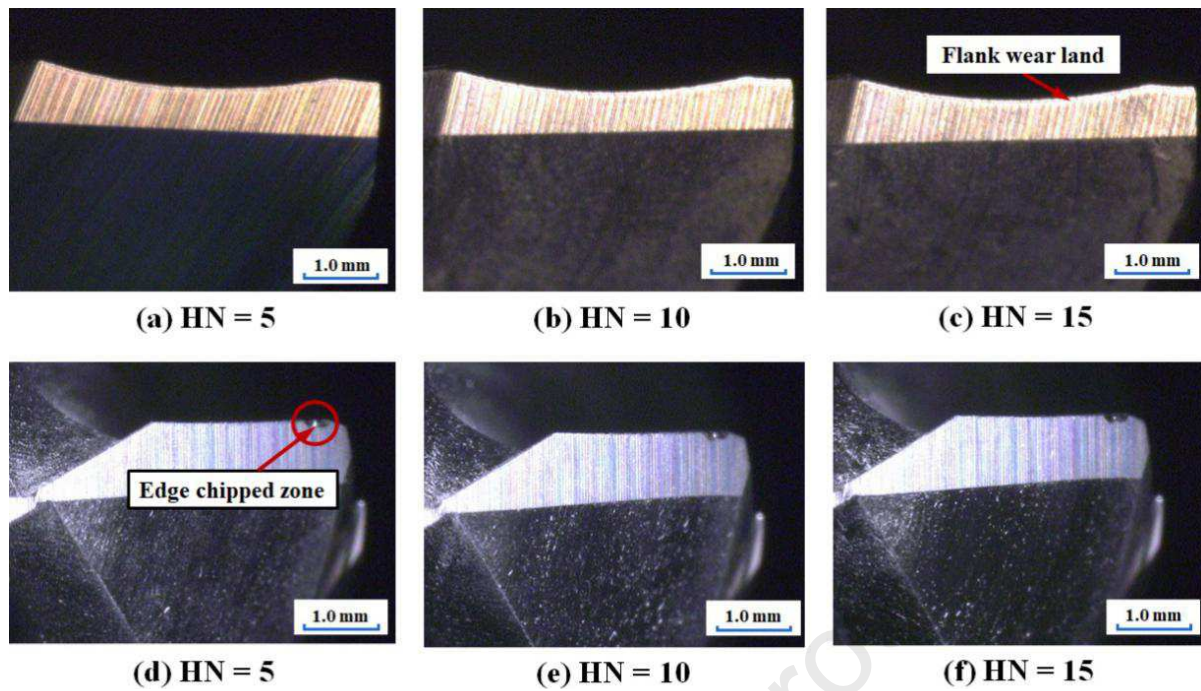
Microscopic morphologies of the worn drill flank surfaces: (a)-(c) candlestick drills and (d)-(f) step drills.
